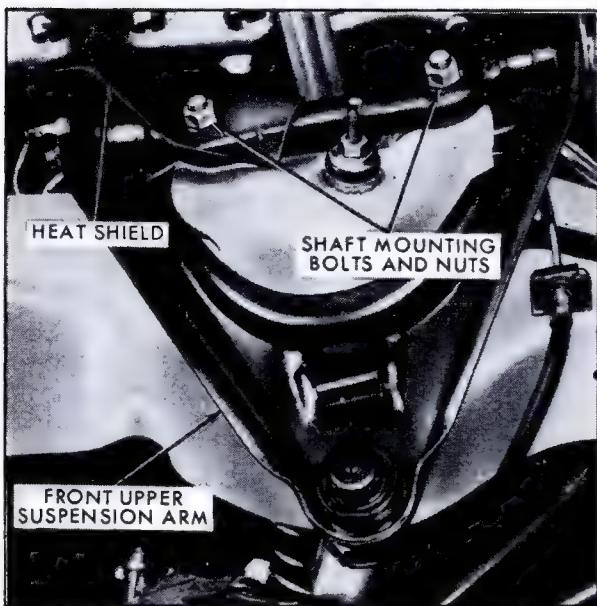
Upper Arm and Shaft Assembly Installed
